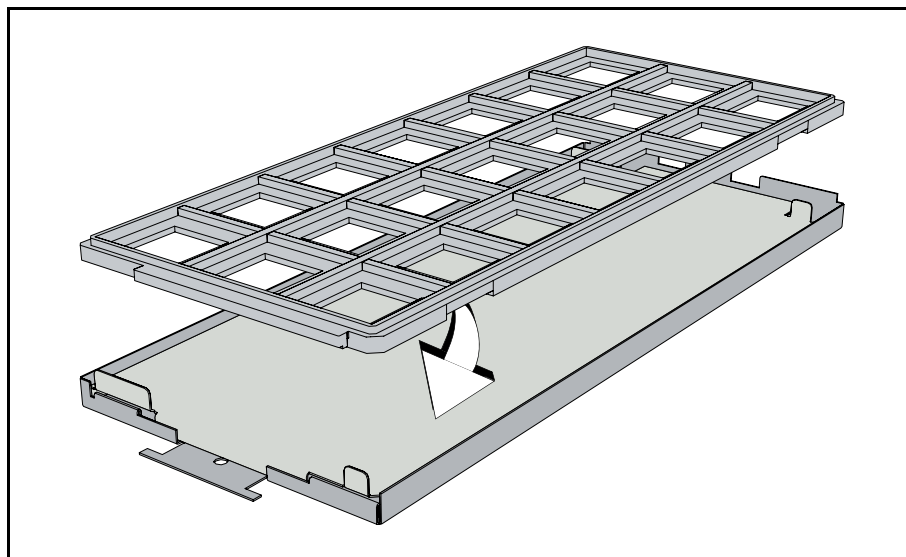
Loading a Narrow JEDEC TEX Pallet.
